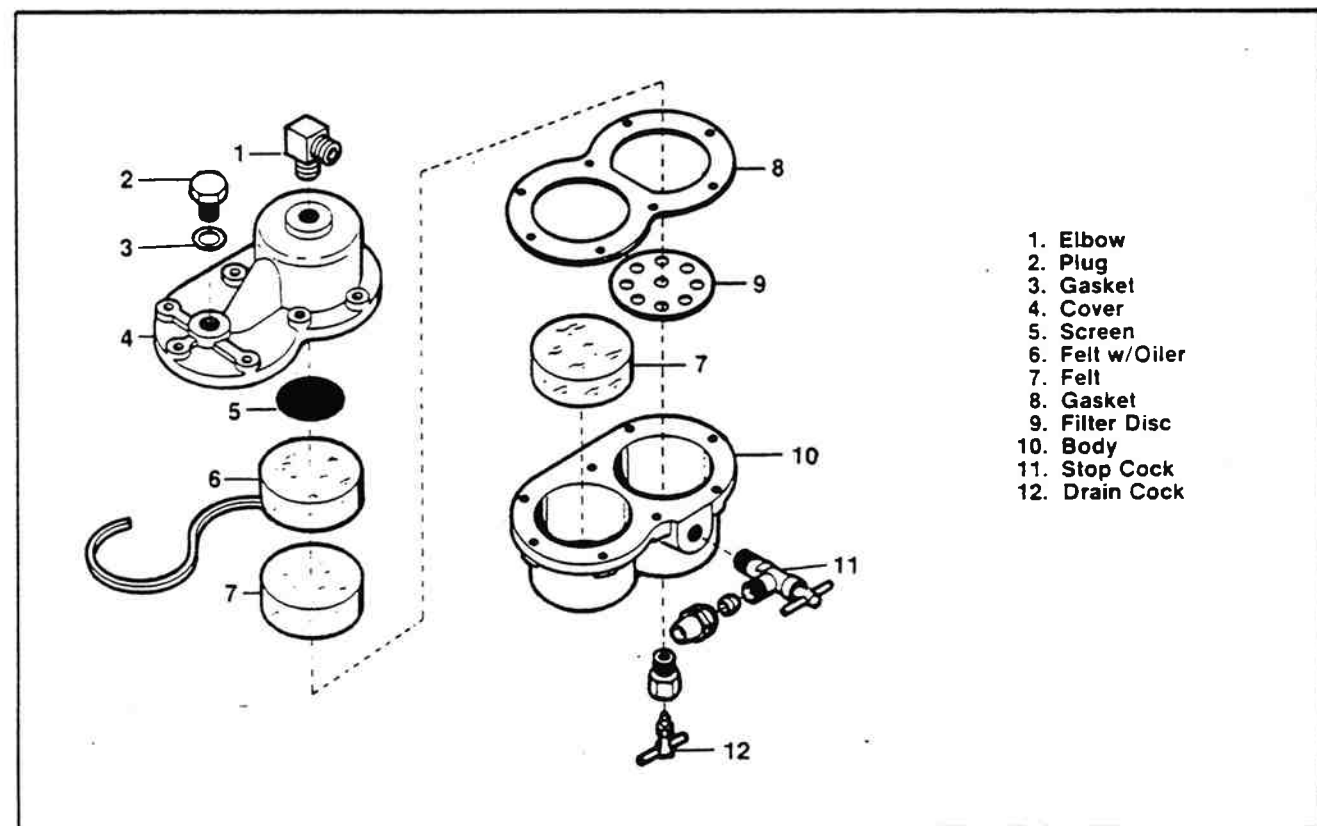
Shutterstat Air Filter Parts Breakdown.
